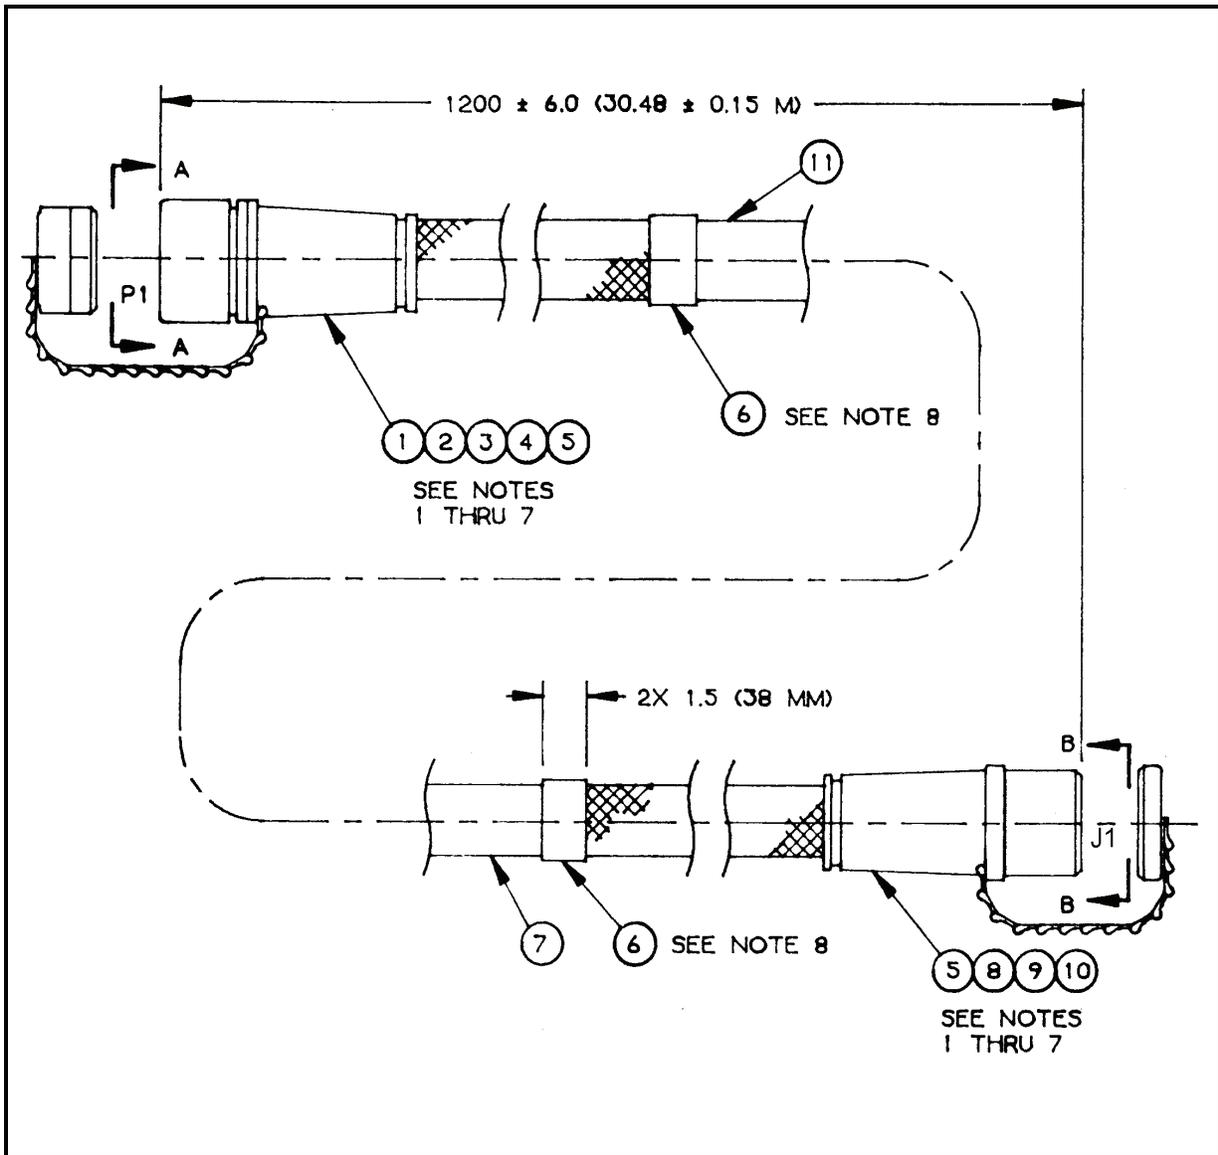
Service/Feeder Cable Assembly, 40/60-Amp, (100 ft) (1 of 2)
